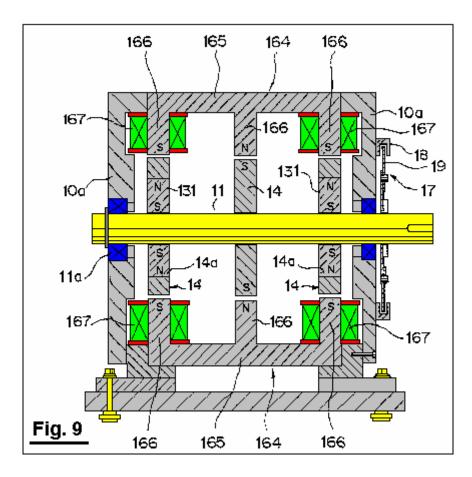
through 9 are cross-sectional view illustrating a modified form the motor;
